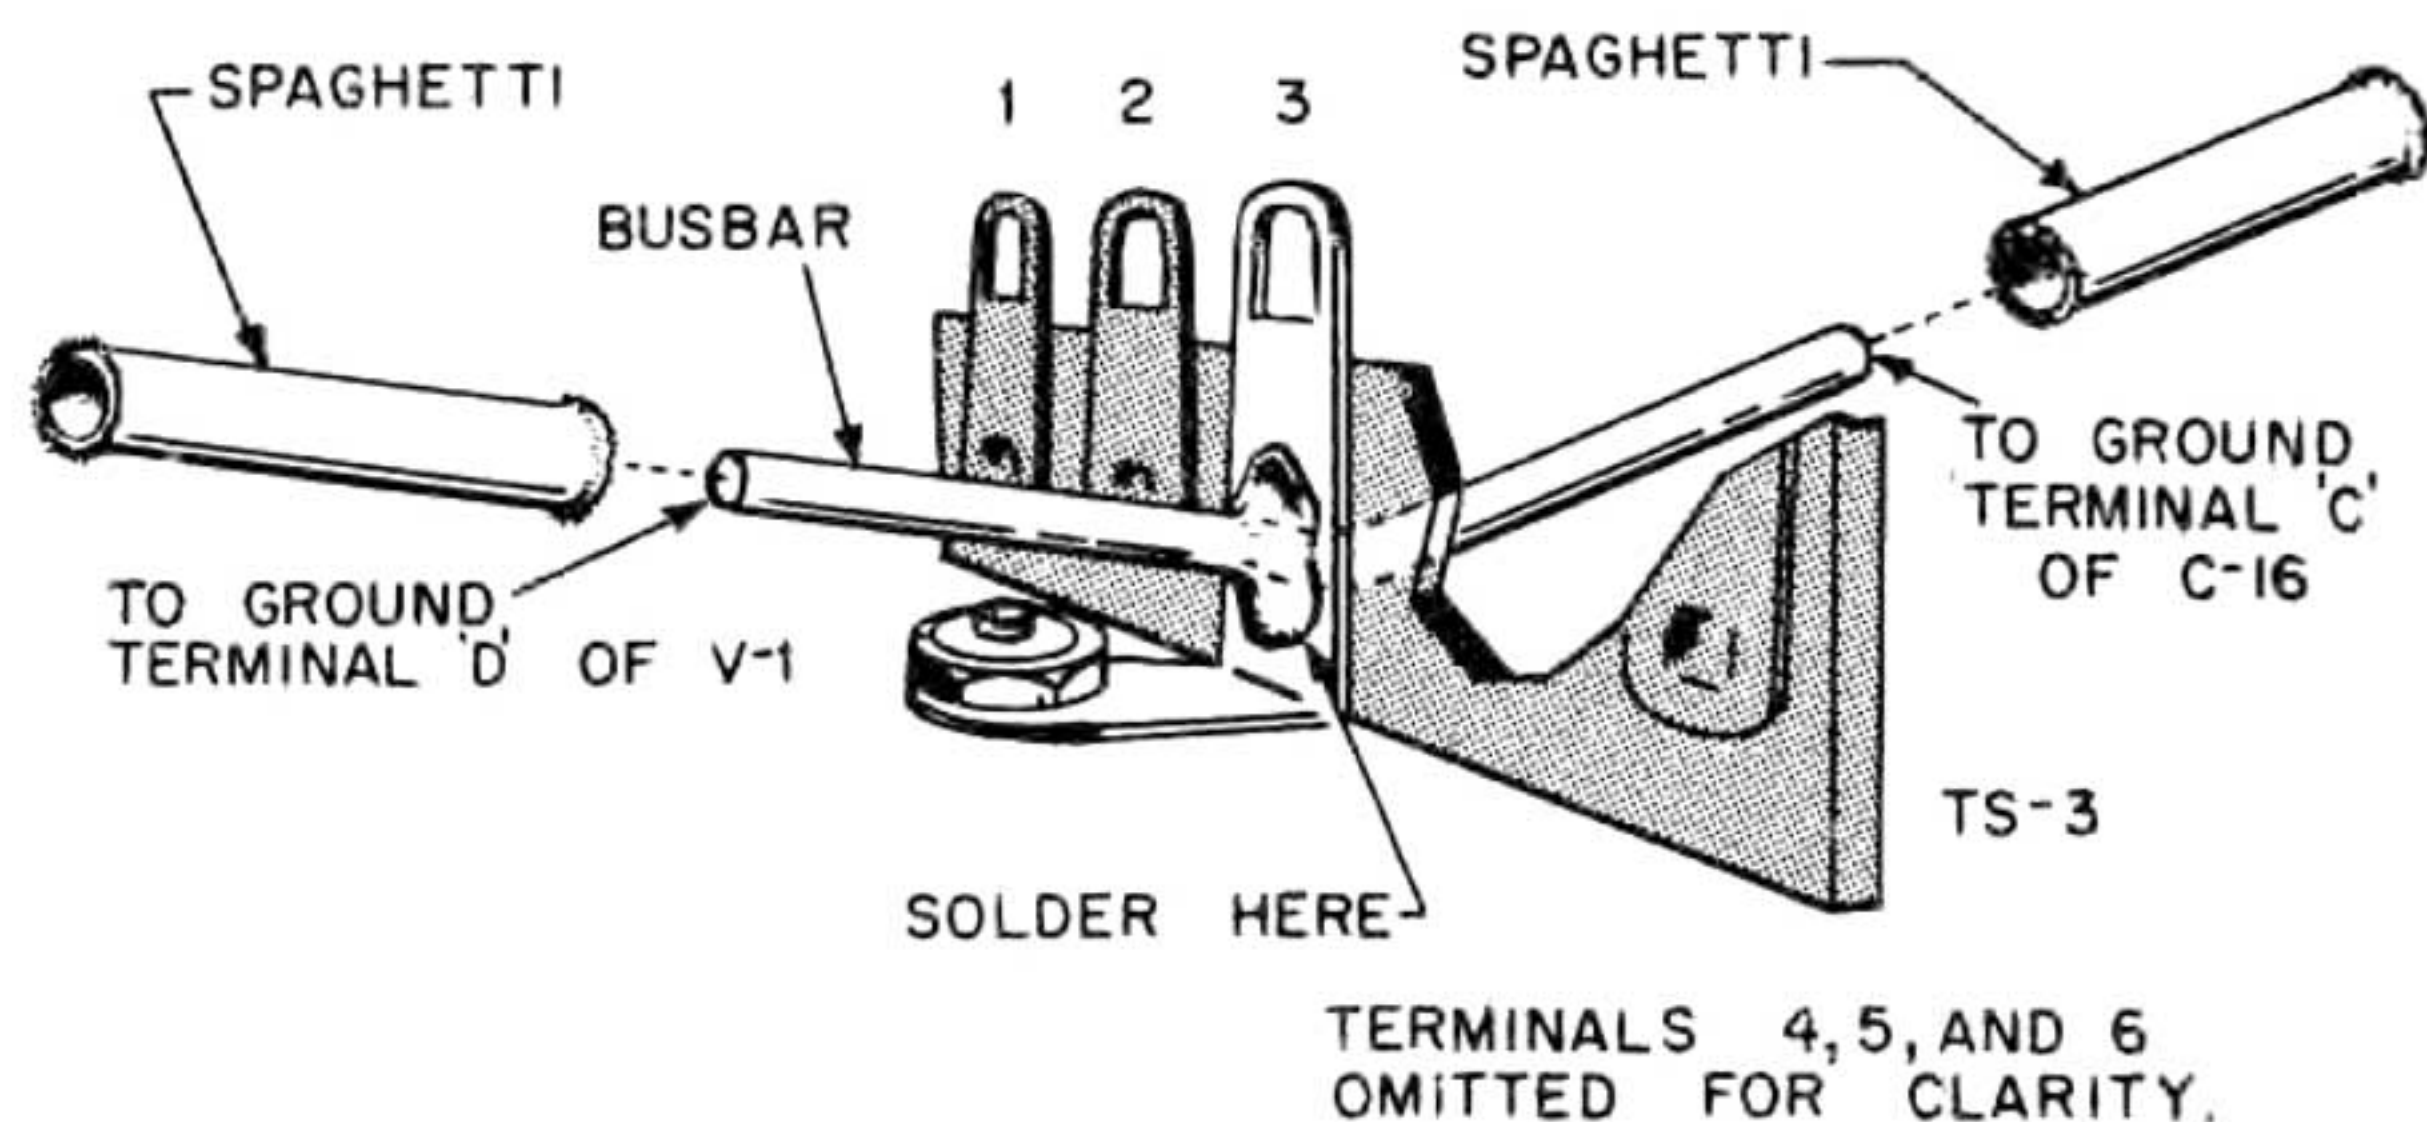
DETAIL ON WIRING OF BUSBAR
